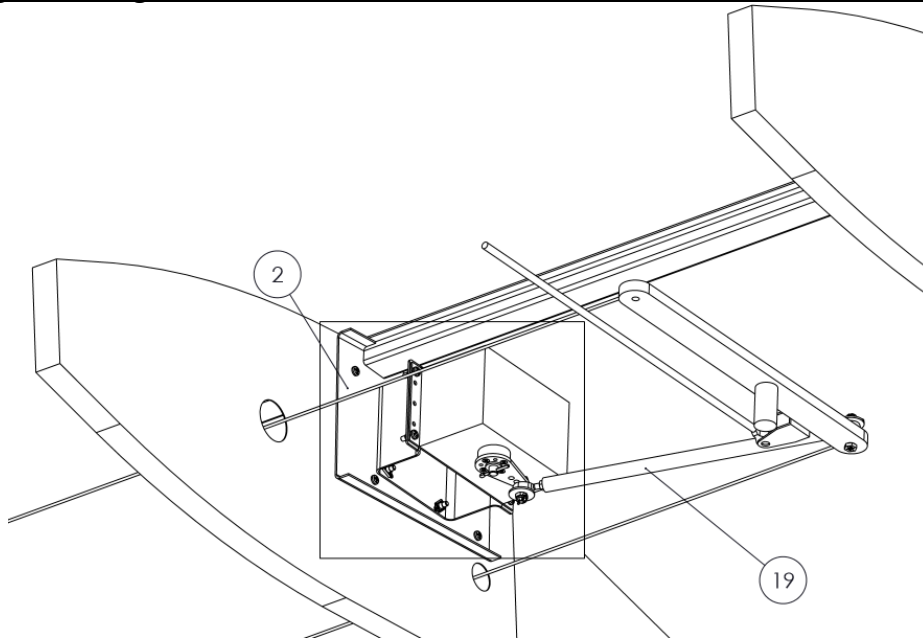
COMPLETE ROLL SERVO ASSEMBLY
